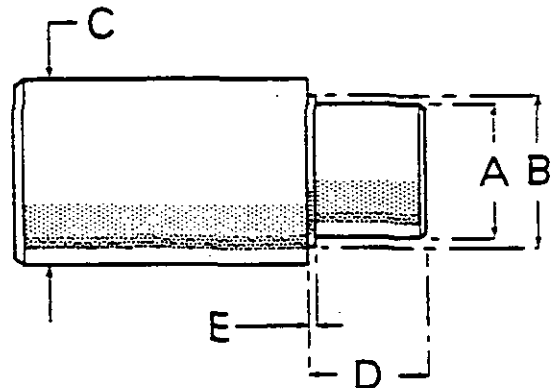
TOOL FOR FITTING DRIVESHAFT BUSH
